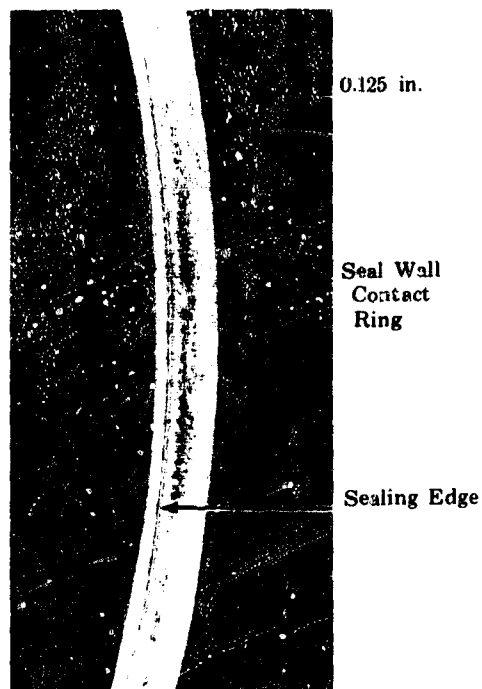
Typical Flat Face Flange Side of Omega Seal
